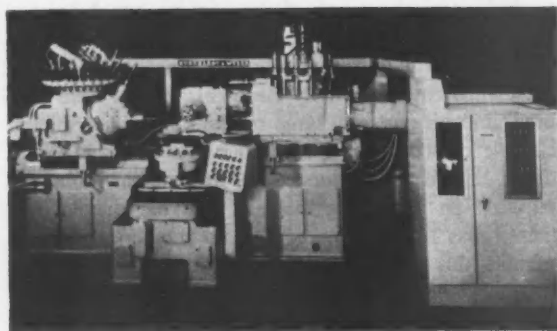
Milling, drilling and boring machine with automatic tool changing (Burkhardt & Weber)
